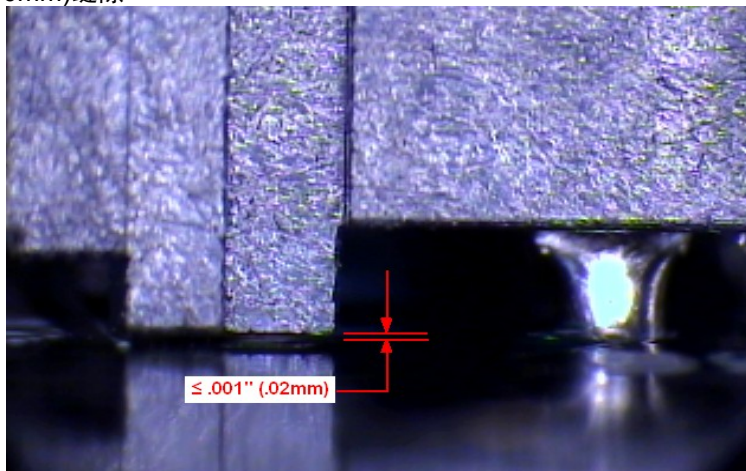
The insulator housing of a reflowed SEARAY™ connector will rest on the board surface or slightly above. SEARAY™ 连接器的绝缘胶壳在回流后与主板之间没有或有一丝缝隙。
